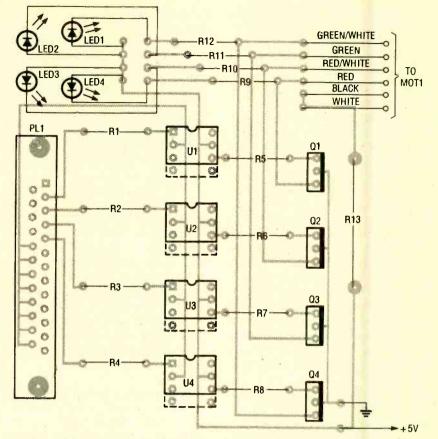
Stuff the printed-circuit board using this parts-placement diagram as a gluide. If necessary, alter the connections to the motor to suit the one you use.
